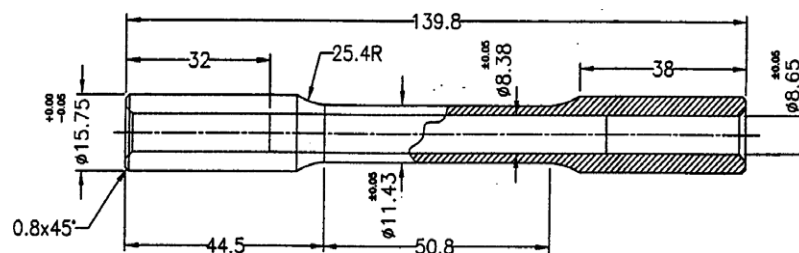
Geometry of the test specimen (Dimensions in mm).
